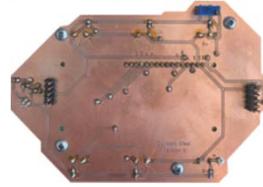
(above): The finished PCB for side 3 with a height of 3.5 in.
